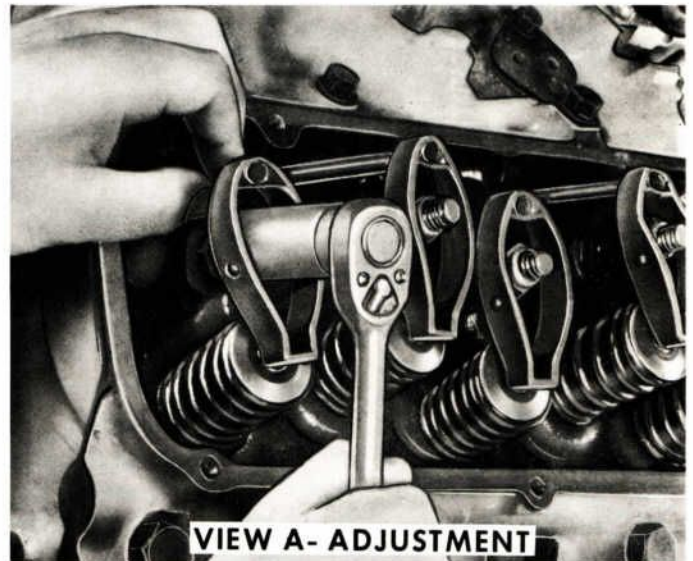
VALVE CLEARANCE ADJUSTMENT POINTS
